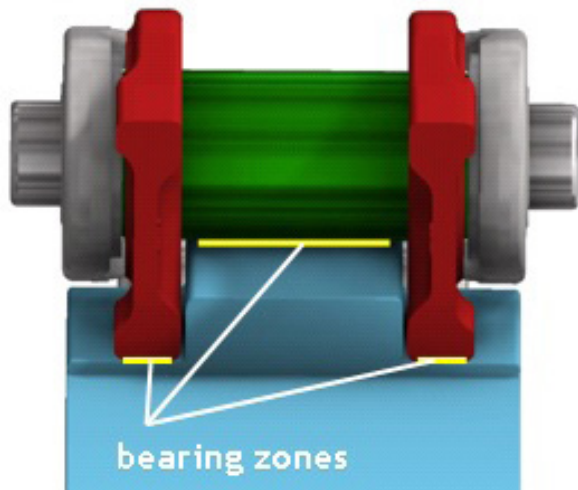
3-point bearing of an inner chain link on shouldered drive rim
